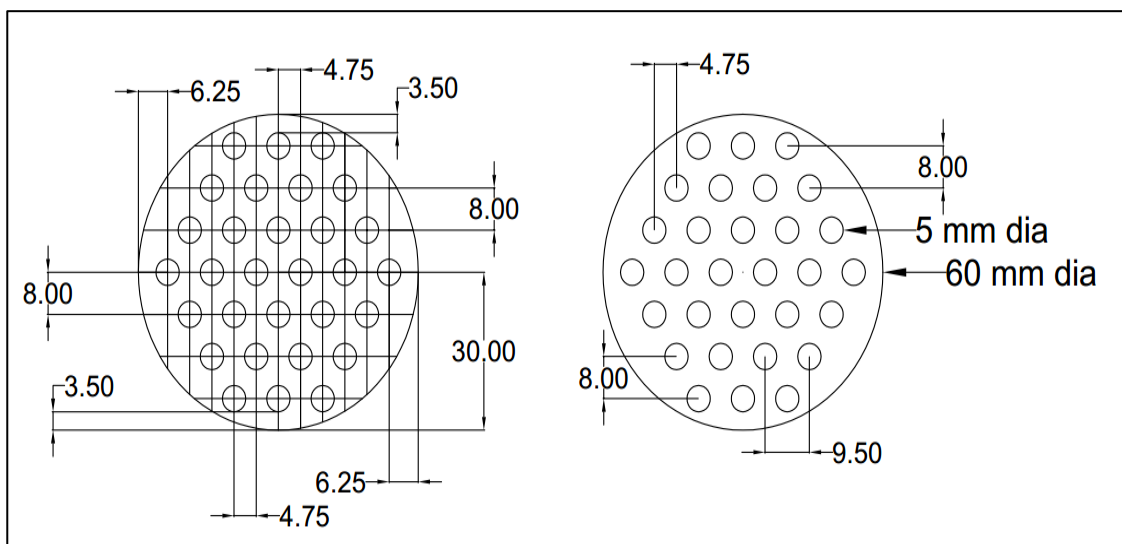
Schematic Diagram of Hexagon pattern sieve plate (All Dimension in mm)
